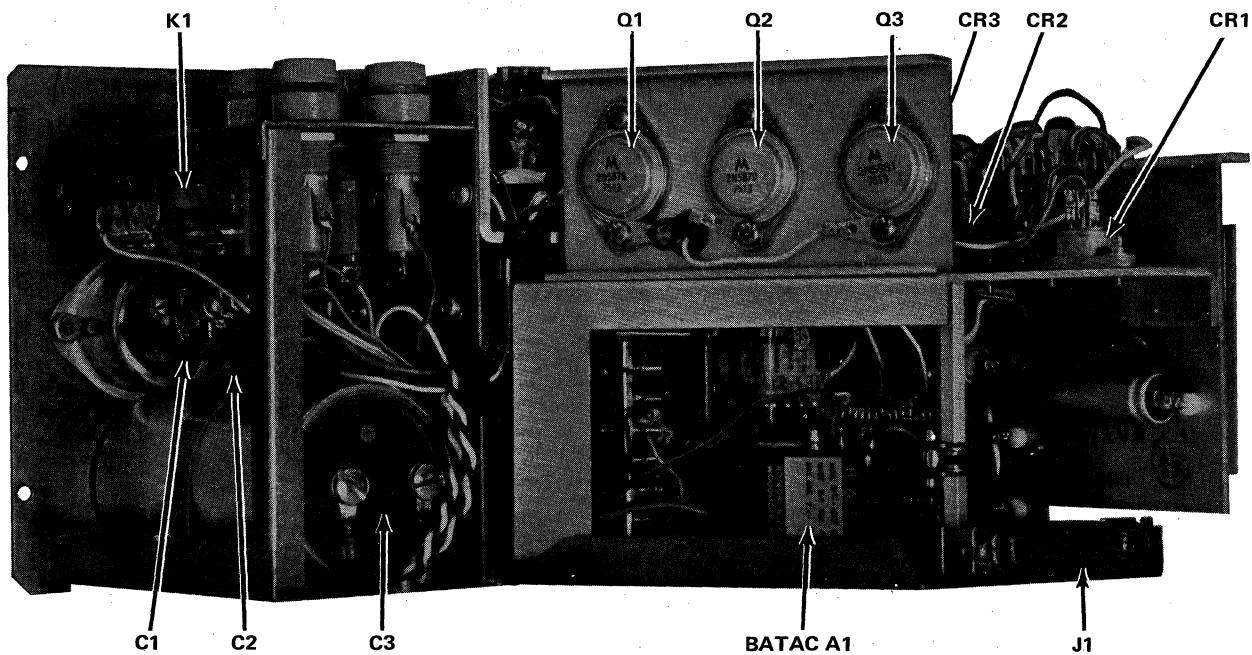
Main Chassis and Rectifier Assembly, Side View
